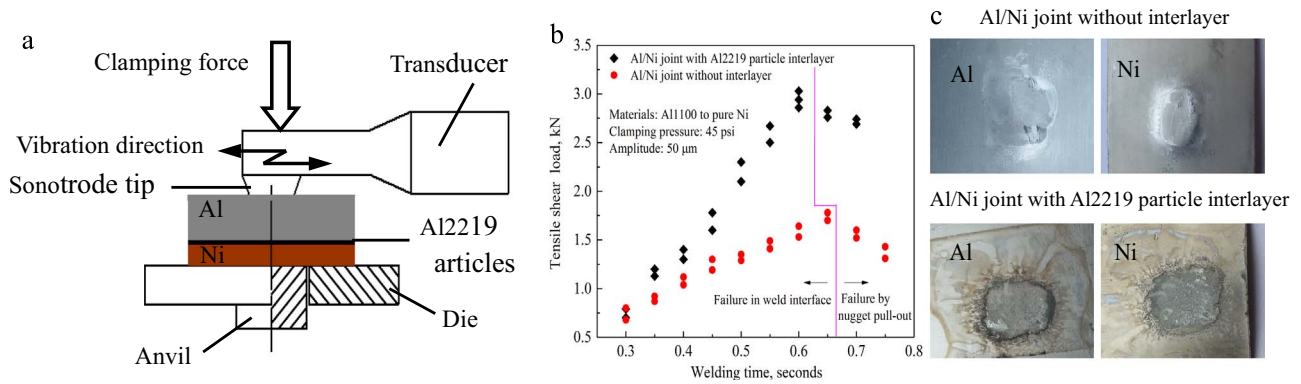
(a) Schematic illustration of ultrasonic welding; (b) relationship between the tensile shear load and welding time in ultrasonic welding of Al/Ni; (c) the typical fracture surfaces of joints with optimal tensile shear load in a welding time of 0.65s (top) and 0.6s (below).
